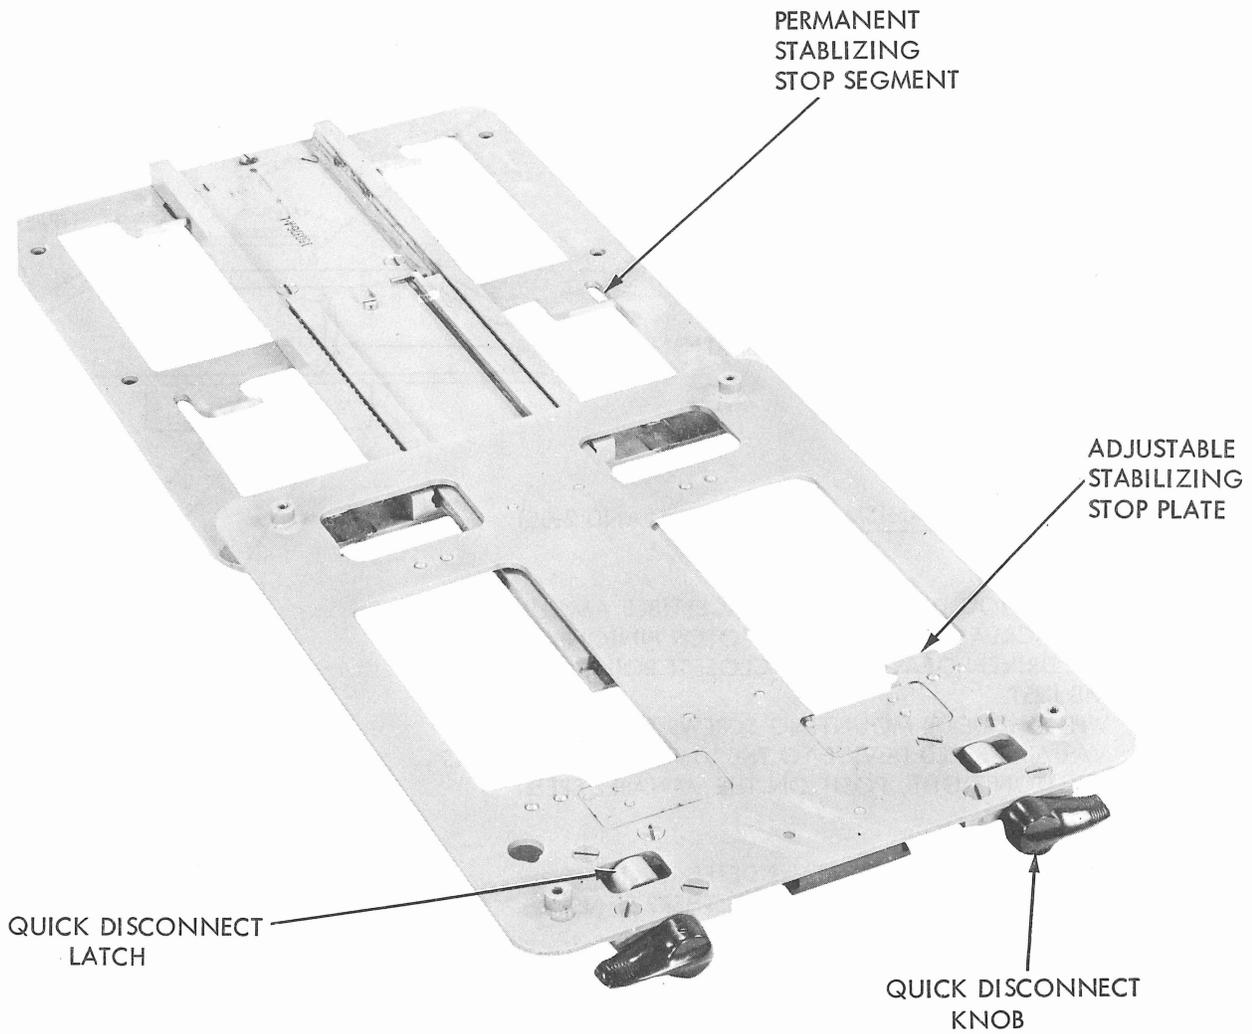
28 Sliding Subbase Assembly For Miniaturized Receiving - Only Typing Reperforator Set (Extended - Front View)
